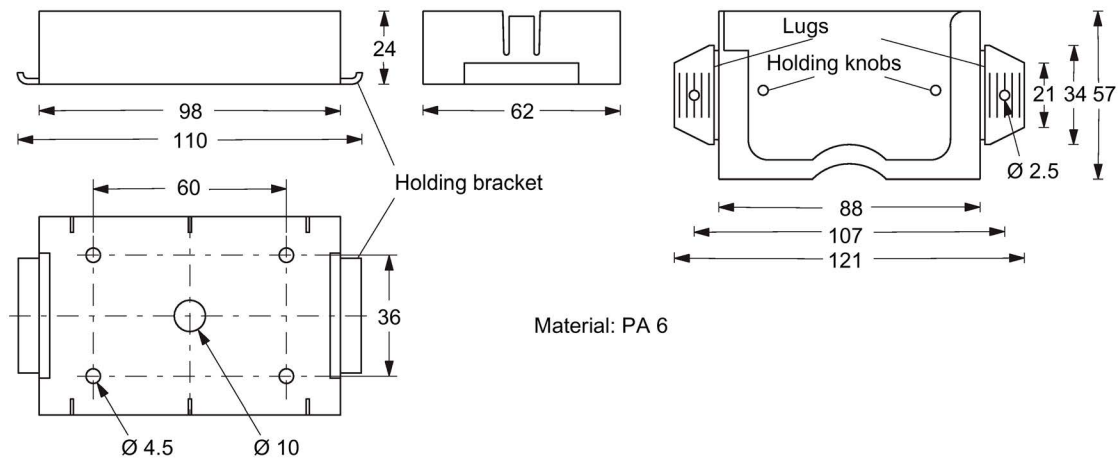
Dimension drawing of spacer 6GT2190-0AA00 with fixing pocket 6GT2190-0AB00
